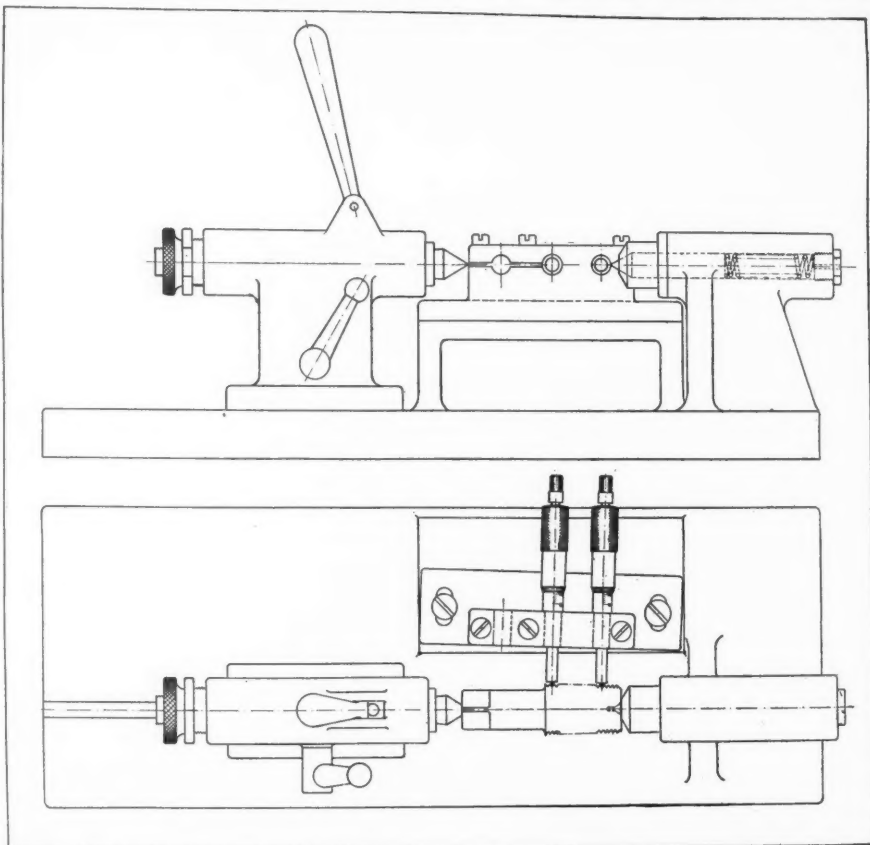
Device for Measuring the Dimensions of Taper Taps
